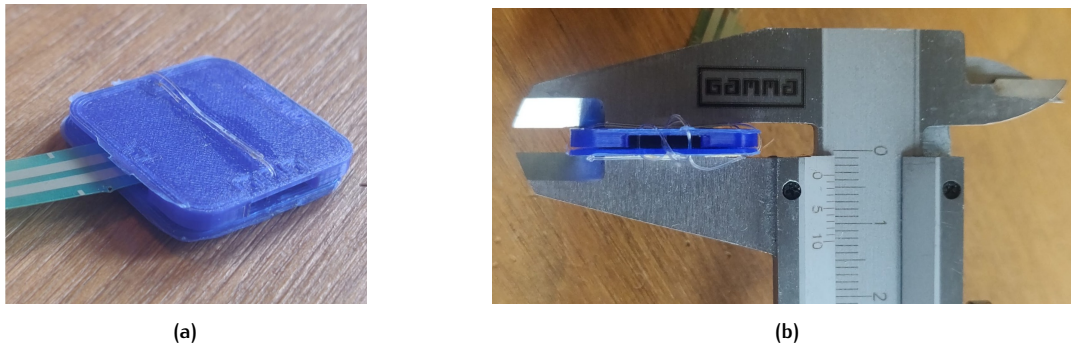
(a) Picture of the fully assembled final sensor integration design (b) having a thickness of 3.4mm.
